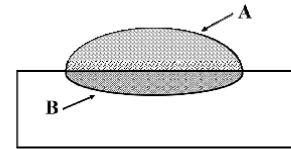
Schematic of the dilution in fusion welding [8].
